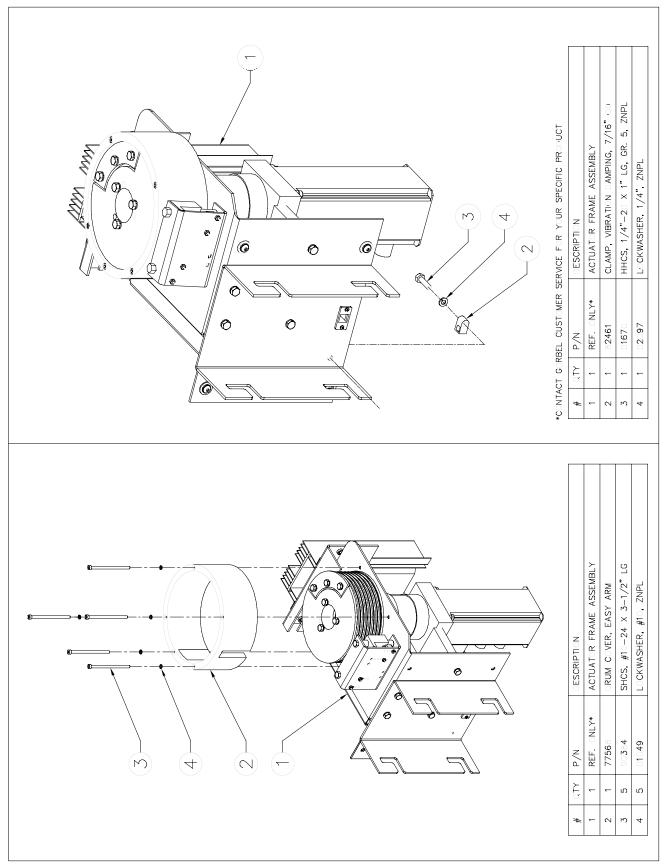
Drum Cover and Power Cord Strain Relief to Actuator Assembly Mounting.
